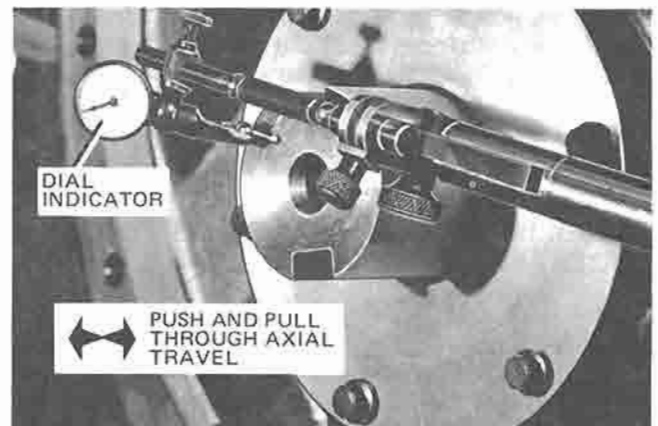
CHECK AXIAL PLAY ON REAR LOW SPEED SHAFT
